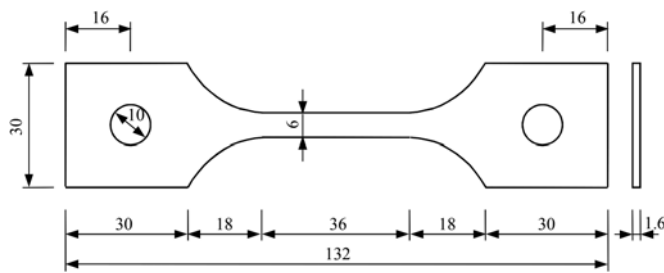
Specimen geometry and dimensions (unit in mm, not to dimension).
